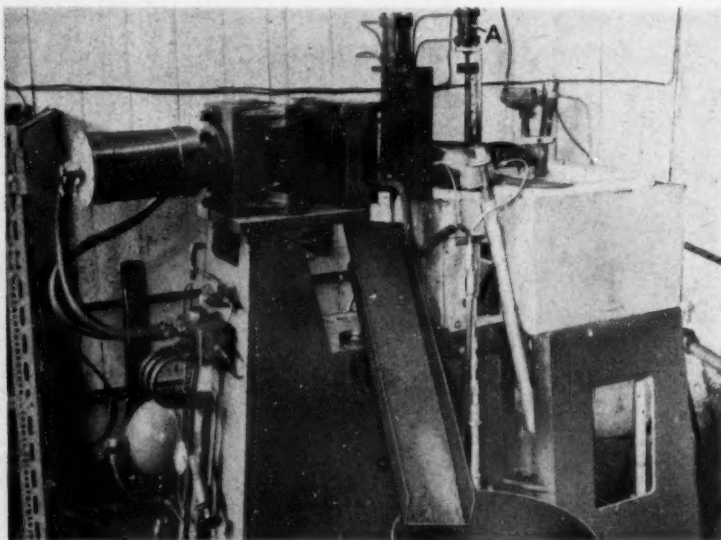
Prototype Machine built by Robar Products (London), Ltd., for the Evaluation of the New Hollow Pressure Die Casting Process for Producing Hollow Castings Without the Use of Cores
